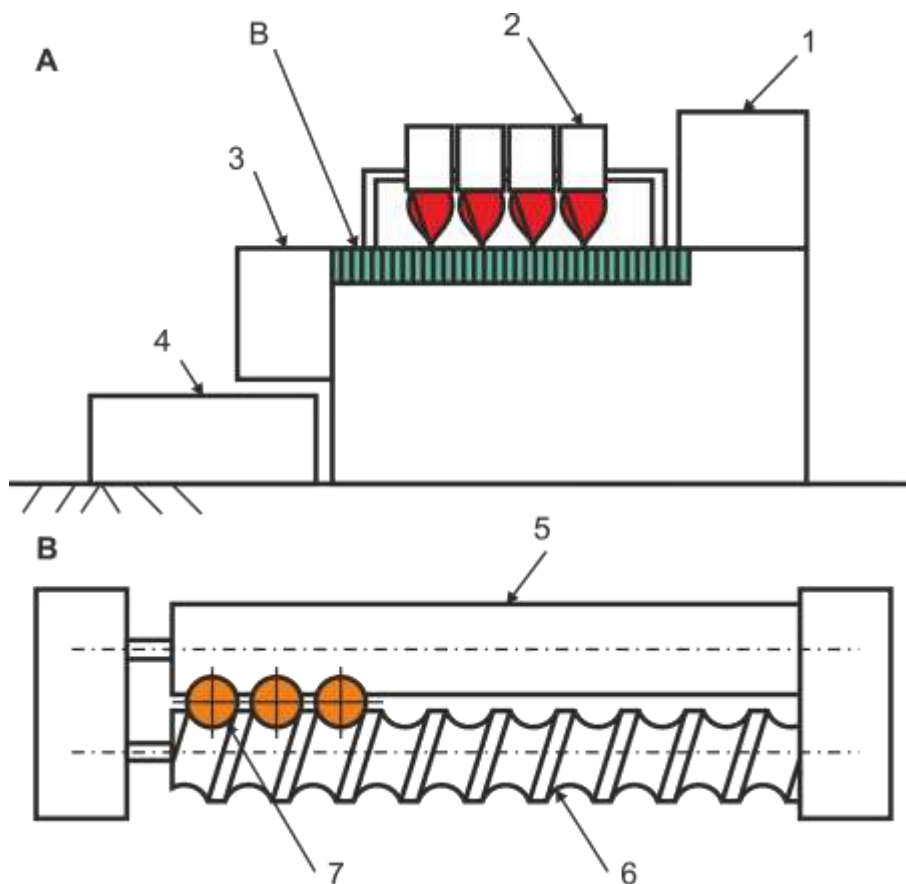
Diagram of the DS squeezer press: A - squeezer press diagram, B - heating path, 1 - vibrating feeder of balls, 2 - burners, 3 - squeezing mechanism, 4 - bin for finished products, 5 - roll, 6 - screw, 7 - heated glass ball
